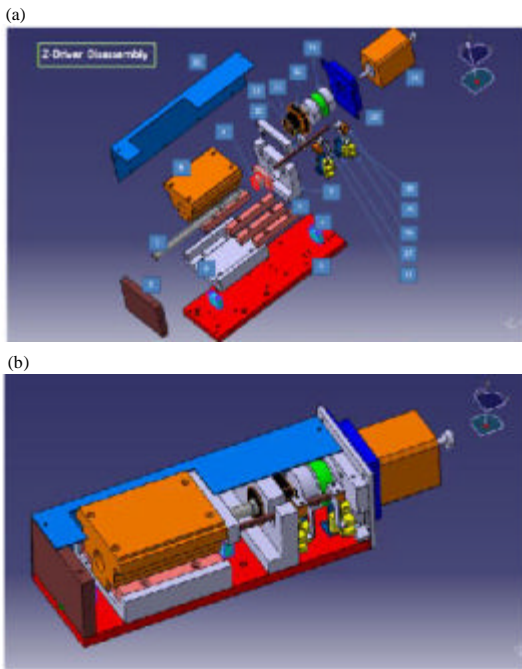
Z-axis test bench: a) Before assembly and b) After assembly
